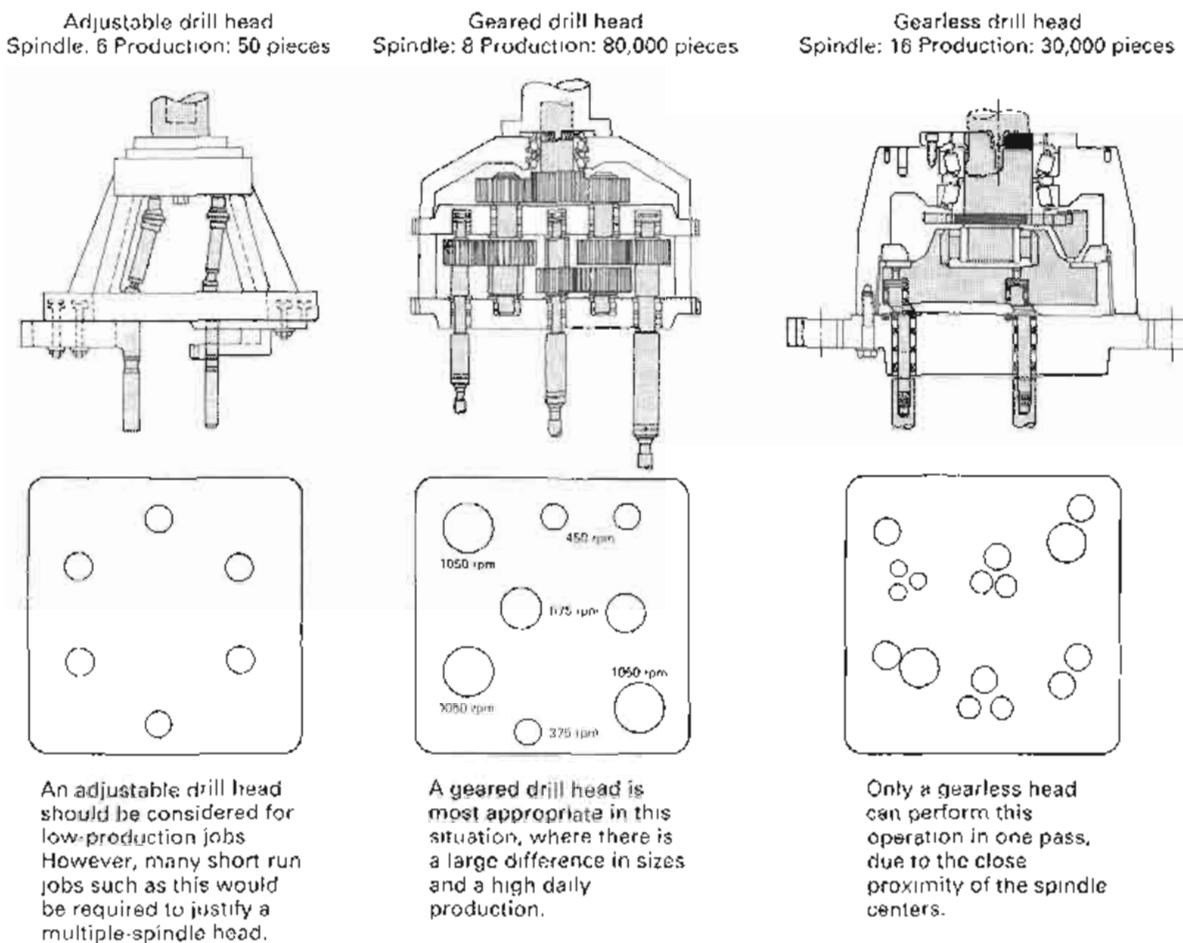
Three basic types of multiple-spindle drill heads: (left) adjustable; (middle) geared; (right) gearless. (Courtesy of Zagar Incorporated.)
